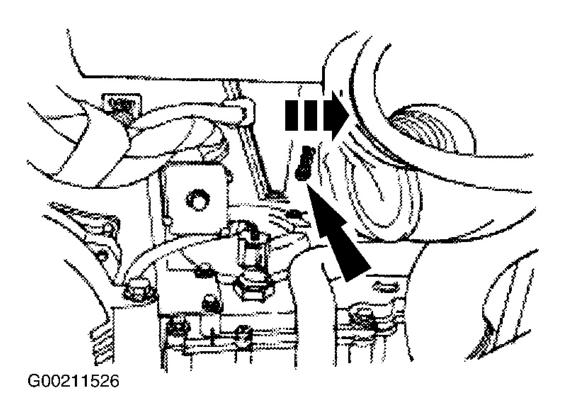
Locating Air Inlet Tube Clamp Courtesy of FORD MOTOR CO.
